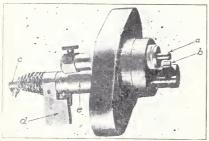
Otto Engine Hammer-Break Igniter Plug.
